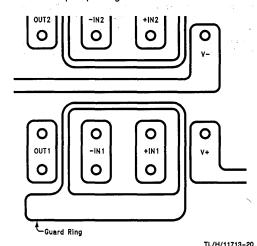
Example of Guard Ring in P.C. Board Layout
